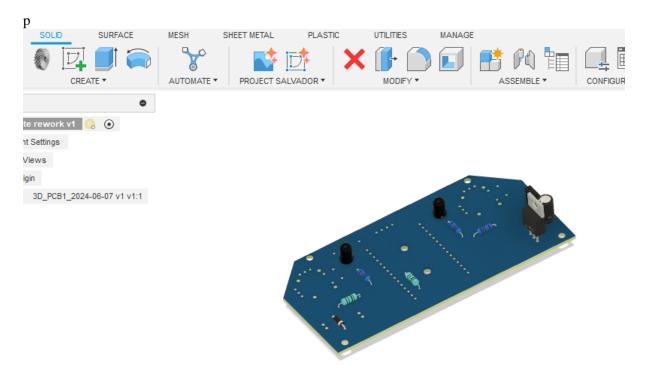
Fusion workspace after importing PCB design from EasyEda
